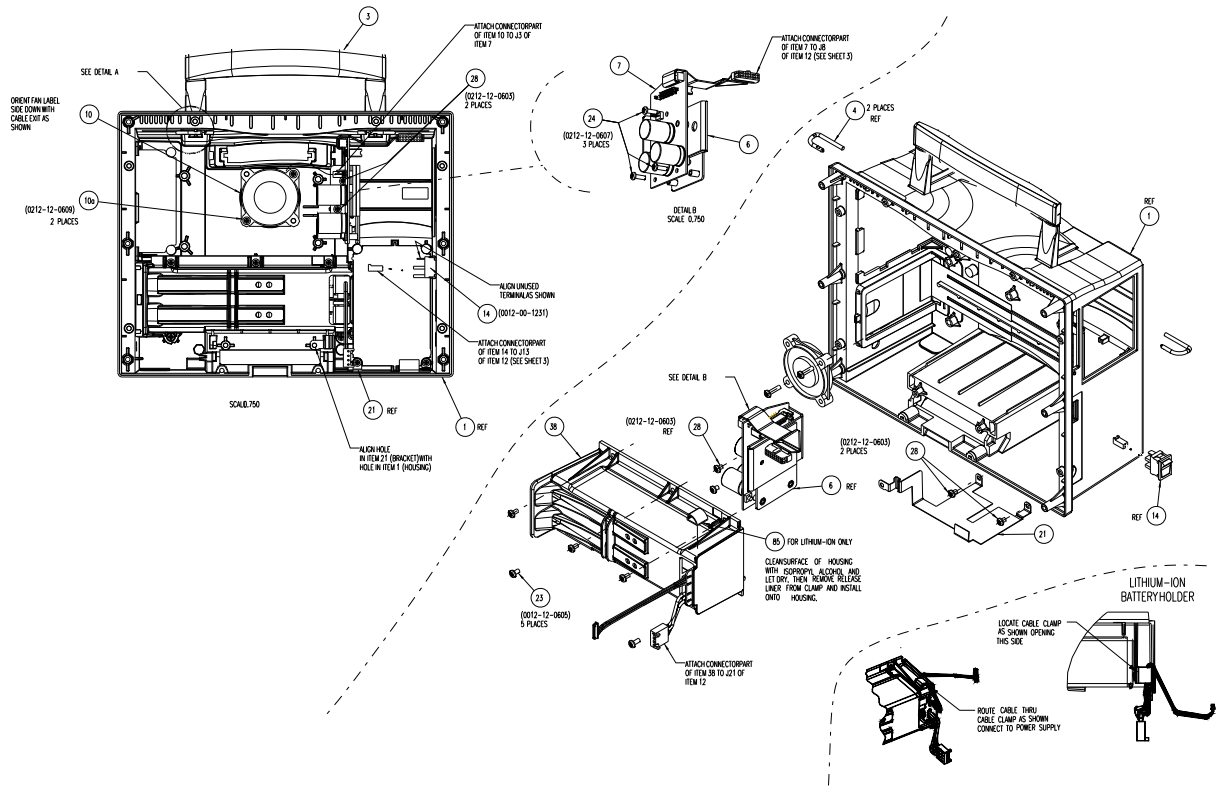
Rear Panel Assembly (Lithium-Ion battery configuration)
